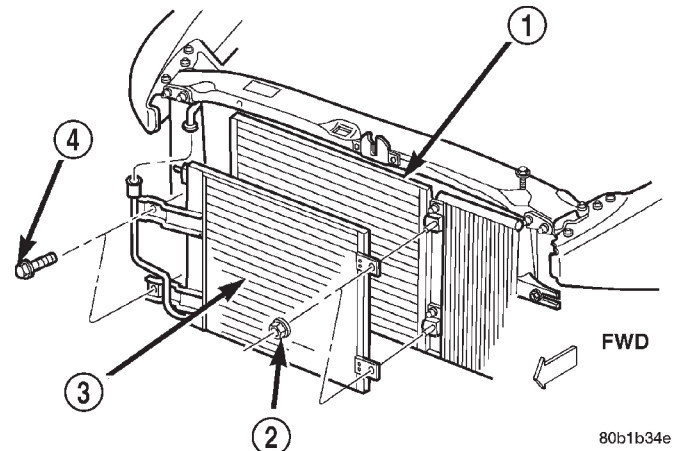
CONDENSER REMOVE/INSTALL - DIESEL ENGINE
